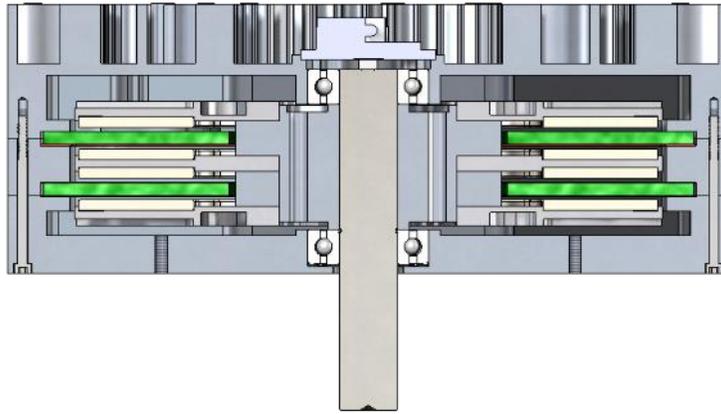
Stacked PCB stators within one motor housing (source: ECM)
